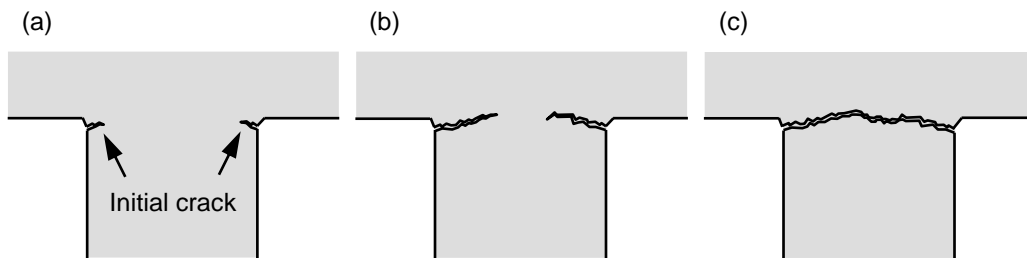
Schematic process of fatigue fracture on micro-sized cantilever-beam specimen: (a) crack initiation; (b) crack growth; (c) specimen failure.
